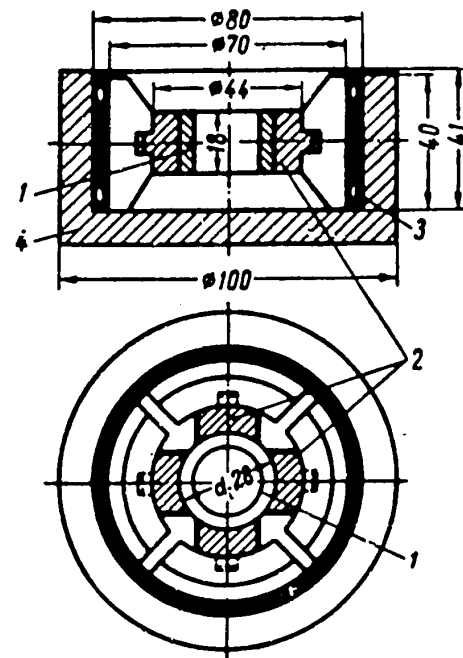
Specimens for Testing on the Ring Friction Machine I-47.
